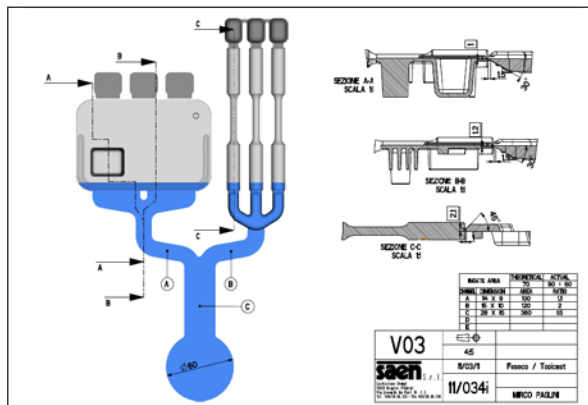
The tooling for manufacturing test pieces prone to shrinkage
